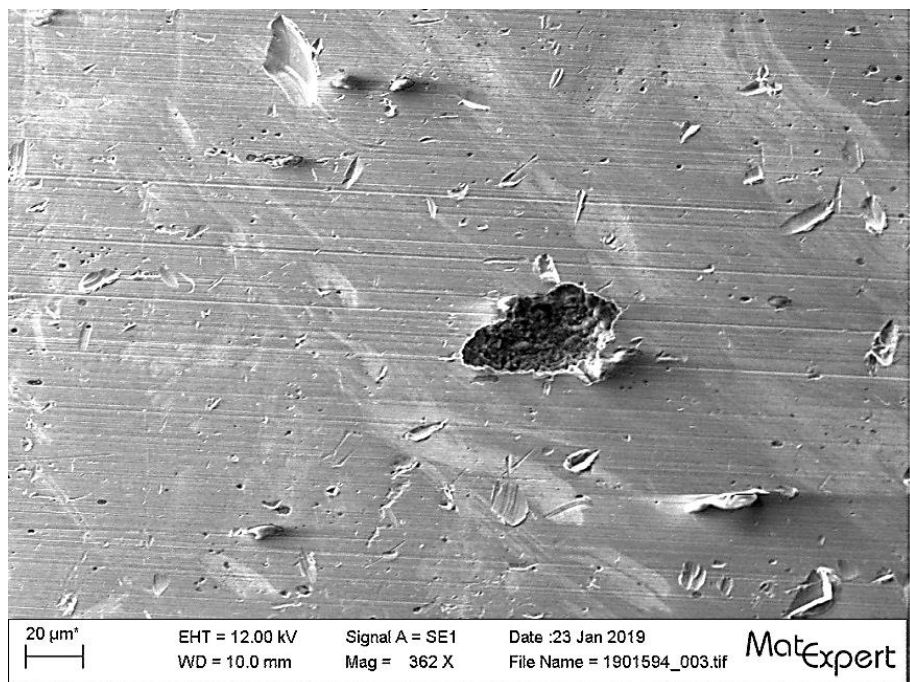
Ball bearing from the centre engine, inner-race bearing track – mechanical indentations, material chipping and pitting.
